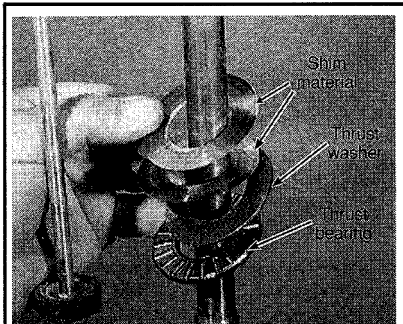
Remove the shim material, thrust washer, and thrust bearing
